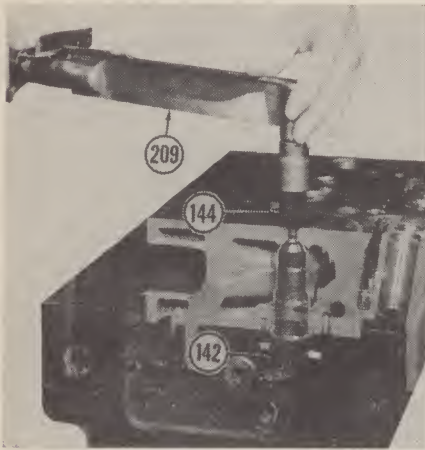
B—GM engine. Upset or flare-over lower end of injector hole tube by applying 30 ft. lb. torque to upsetting die (144).
